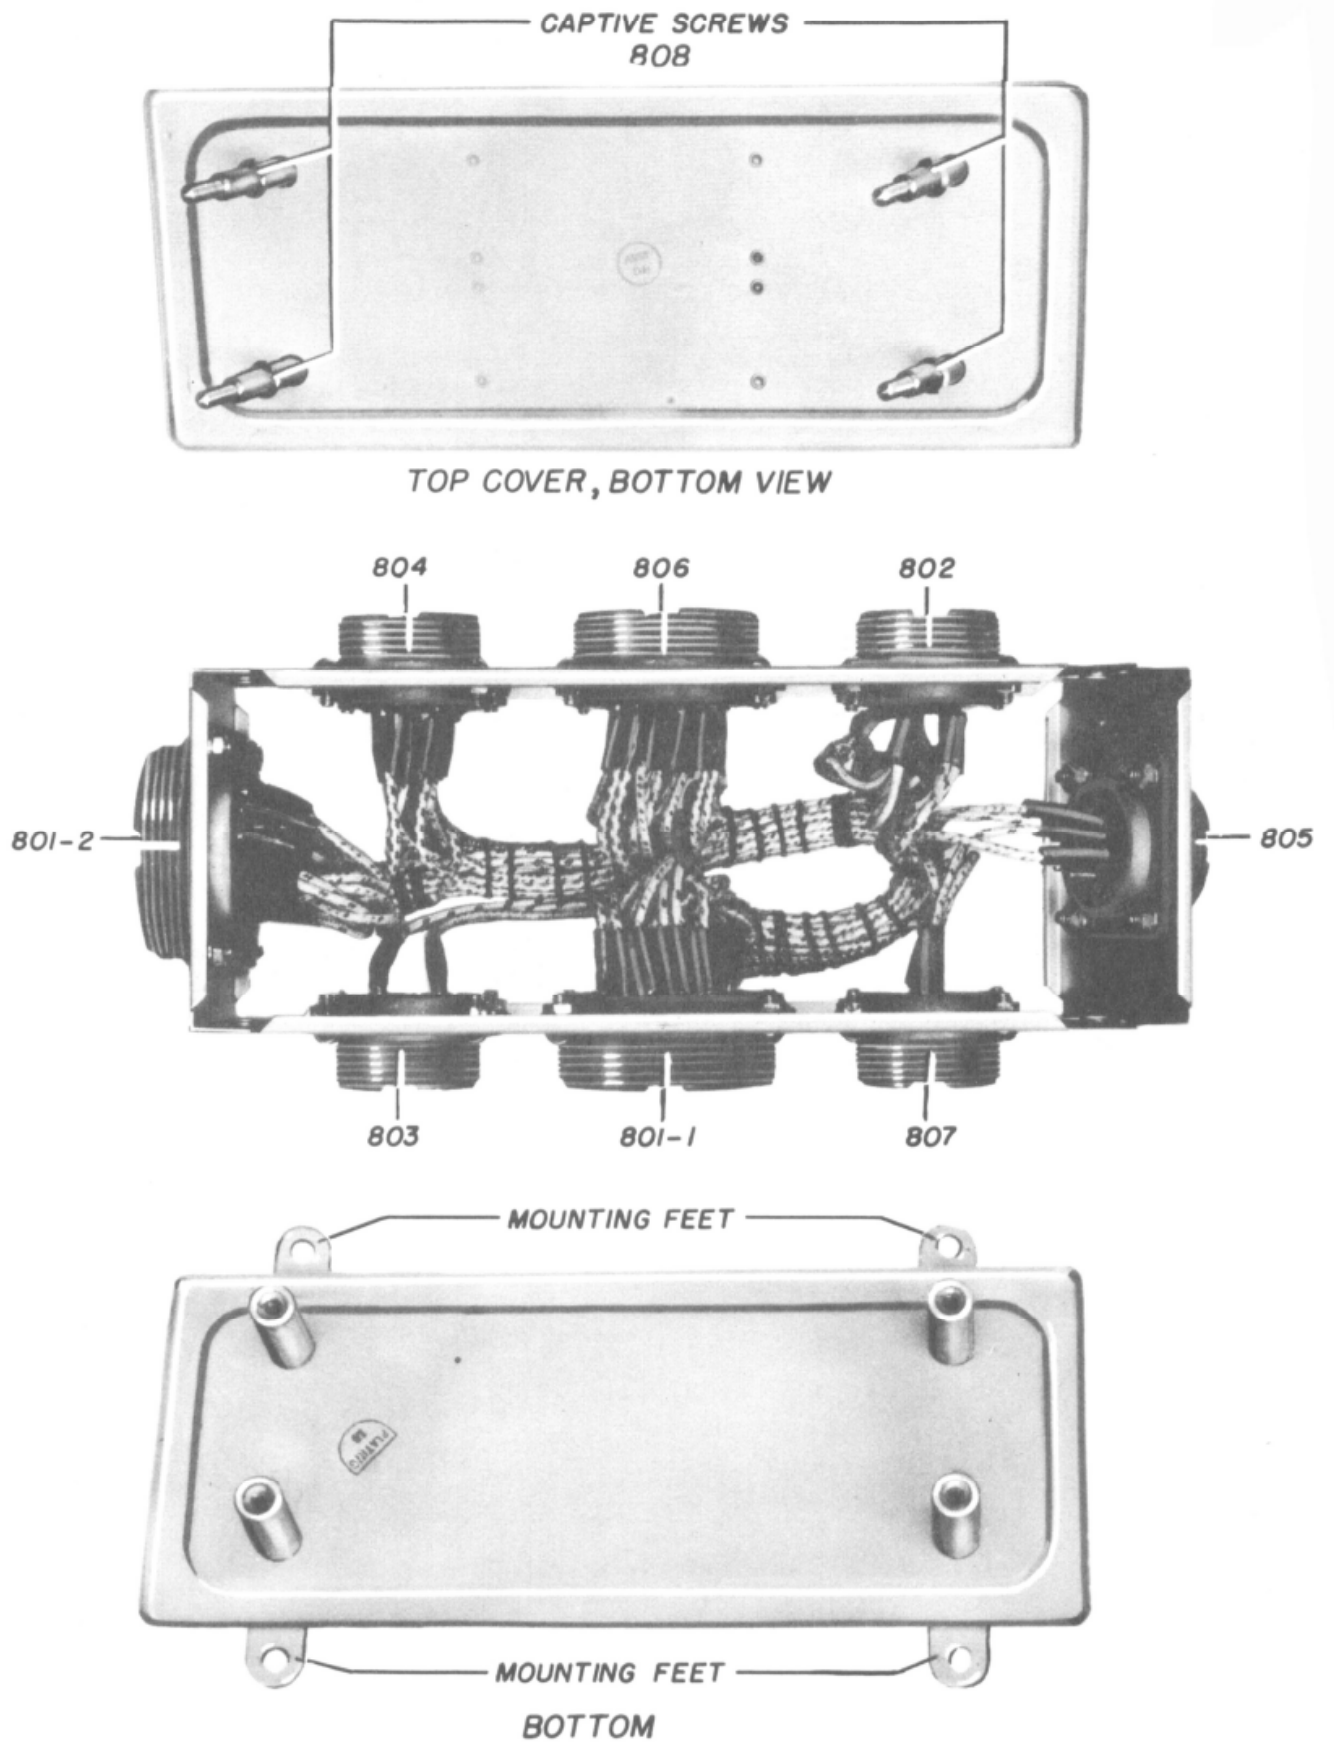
JUNCTION BOX JB-29-A, DISASSEMBLED
